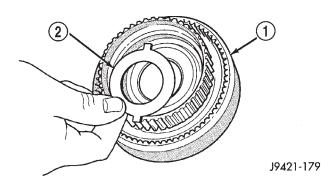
Positioning Thrust Plate On Front Annulus Support
